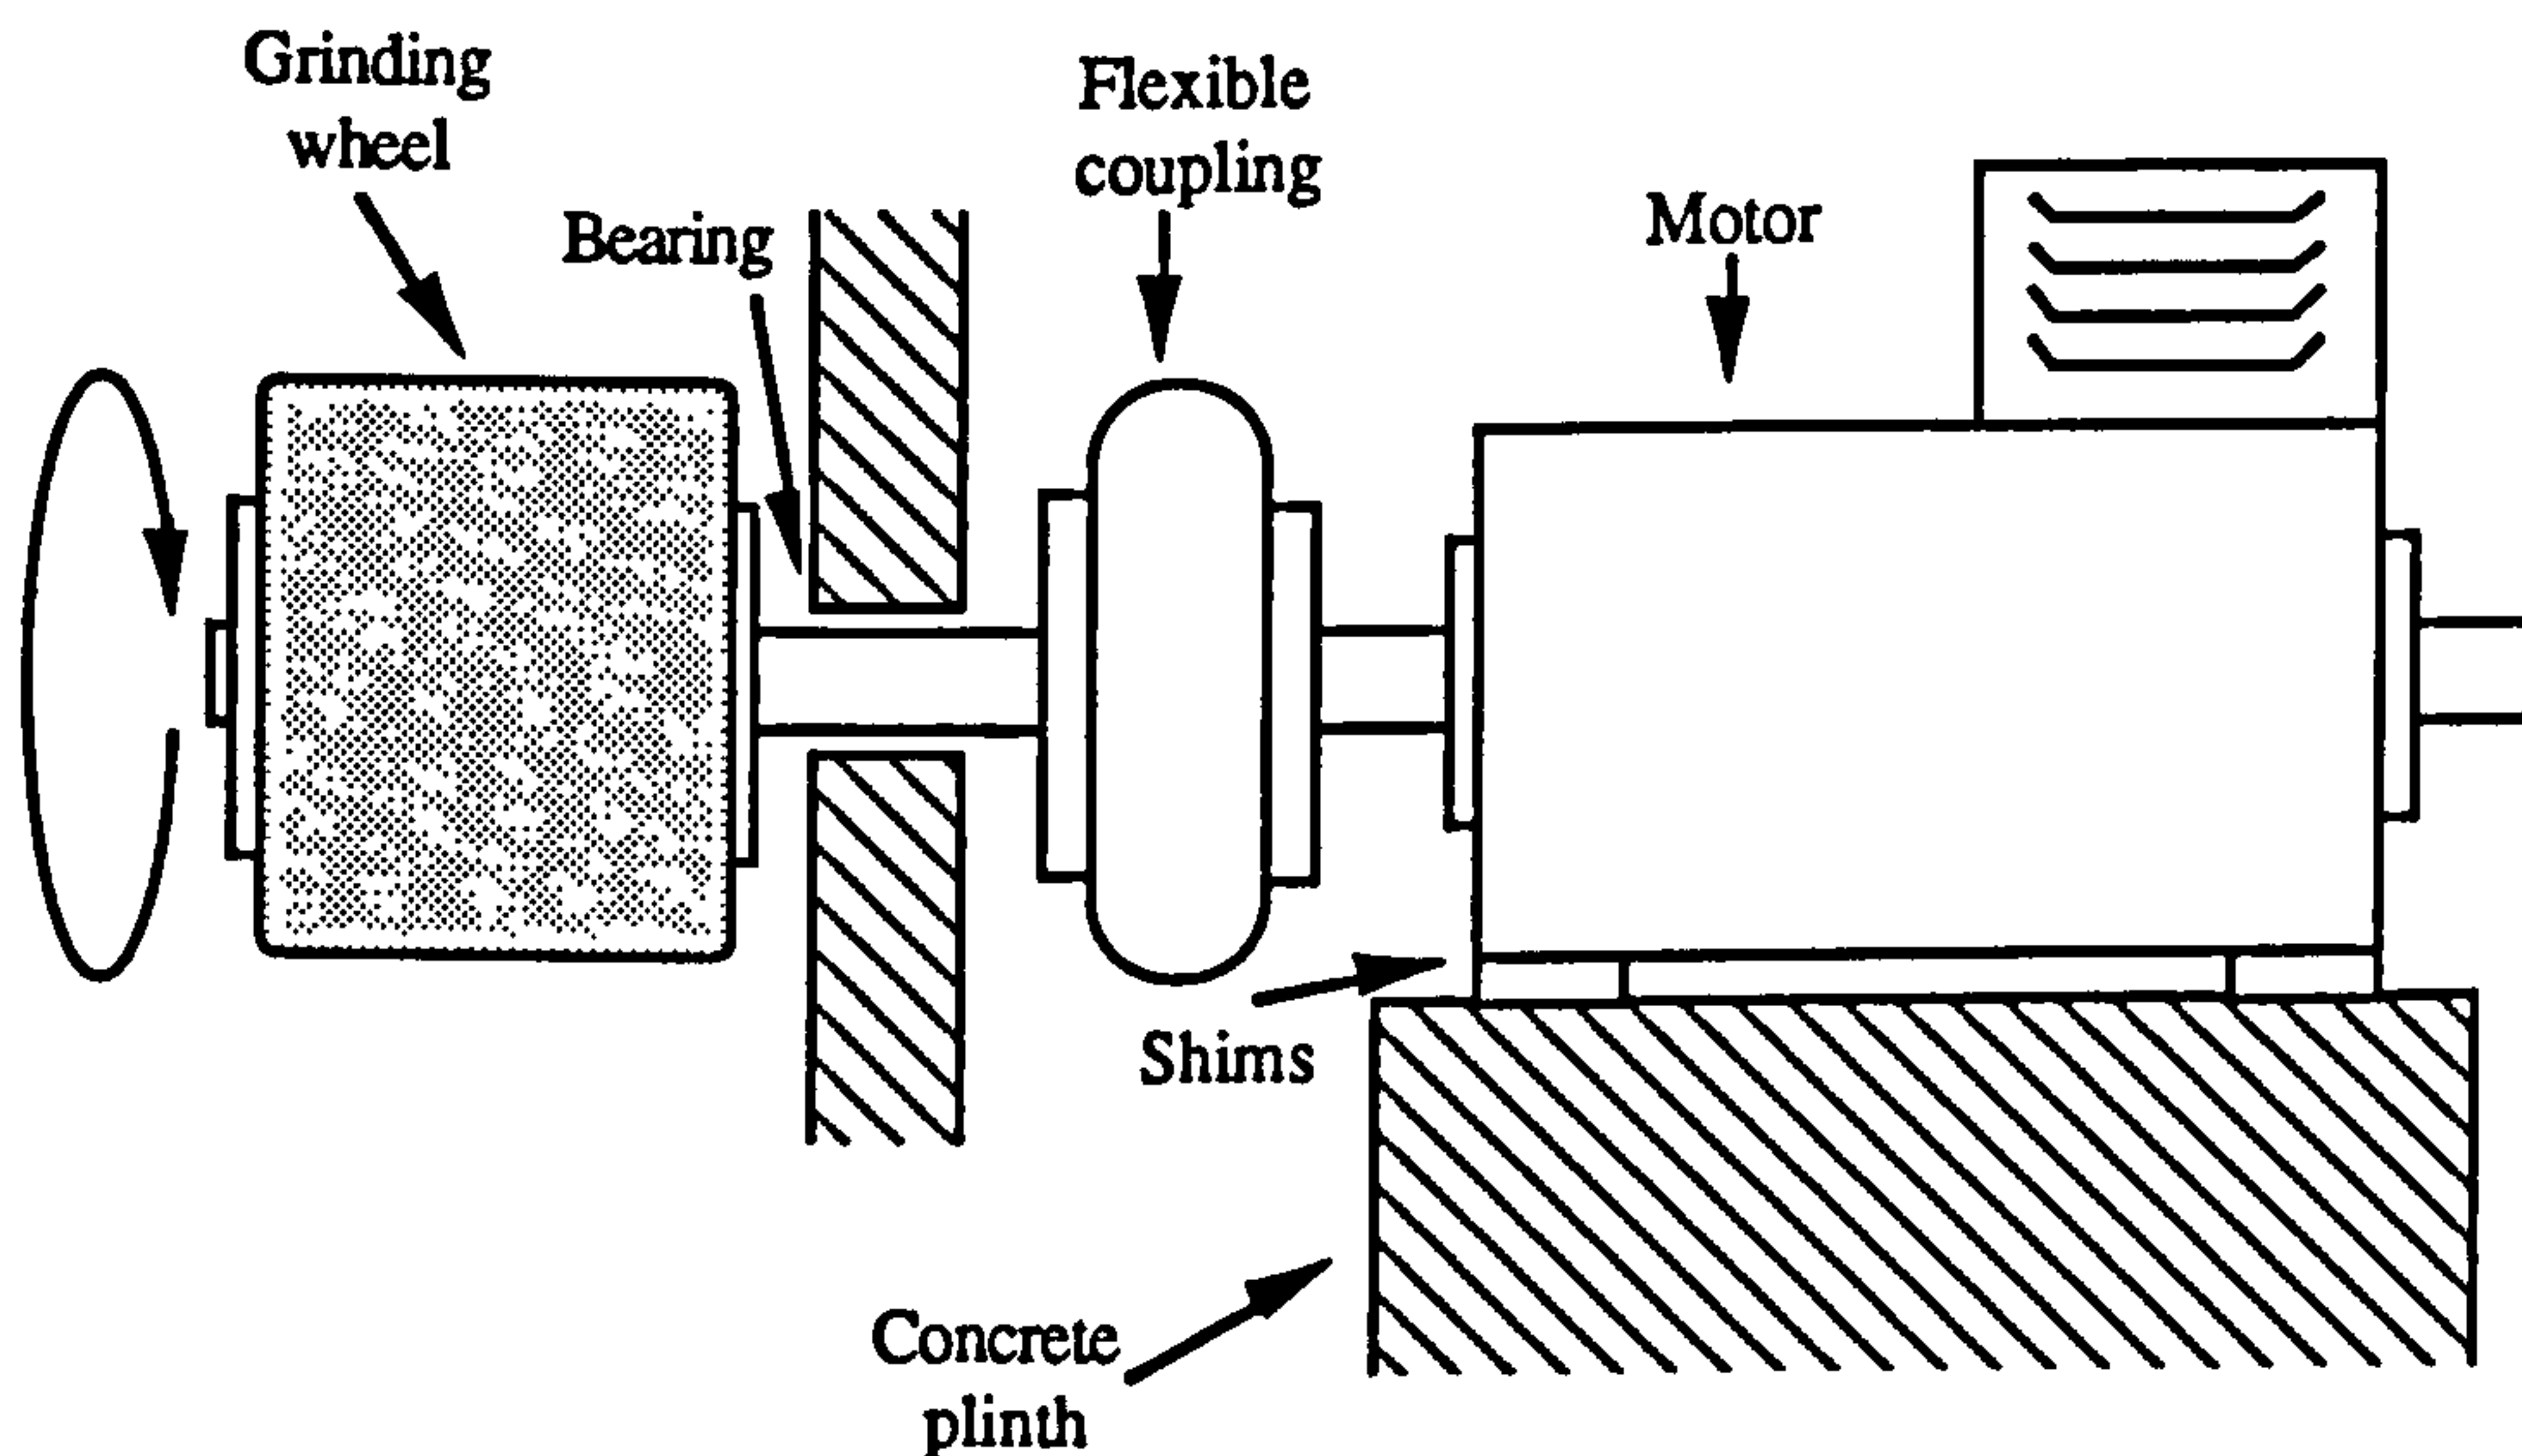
A schematic diagram of the grinding wheel drive arrangement.
